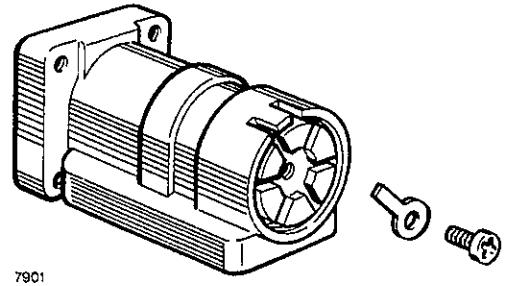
Locking plate, retaining screw and pressure adjusting plug
